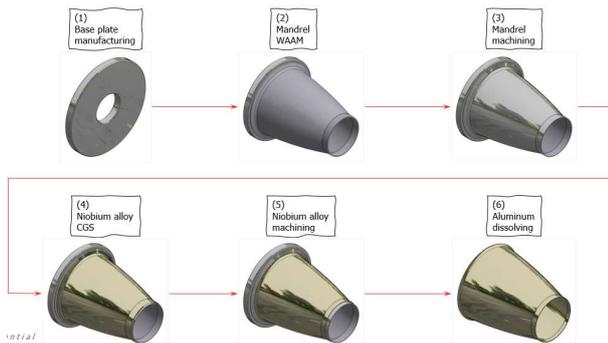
Schematic process flow of manufacturing a C-103 nozzle extension while using WAAM, machining, cold spray and mandrel removal [13].
